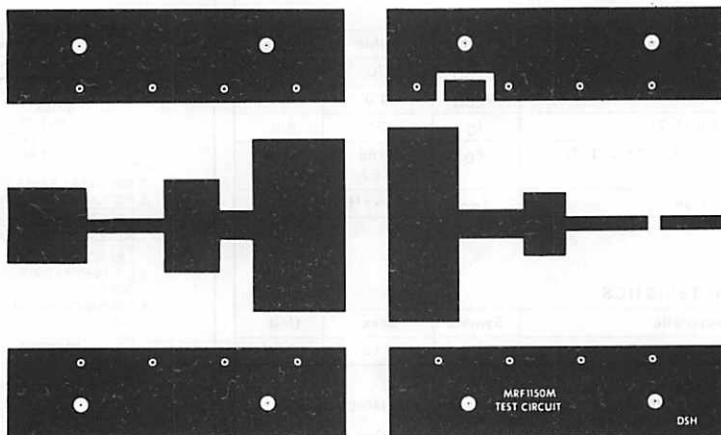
PRINTED CIRCUIT BOARD LAYOUT — 1090 MHz TEST CIRCUIT
